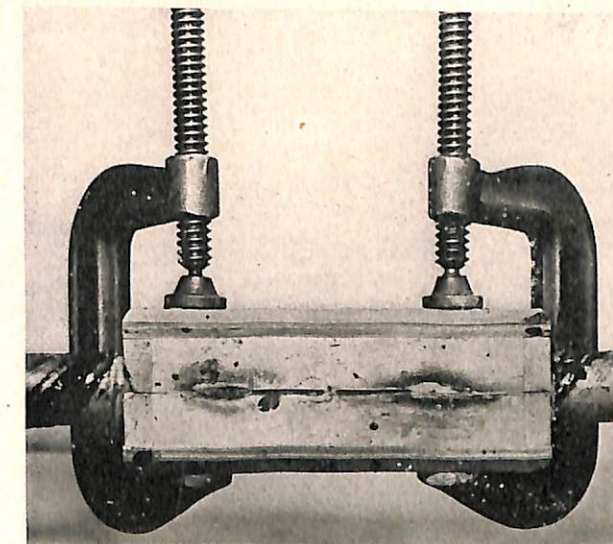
Molding the jacket, using the mold supplied in the kit.
